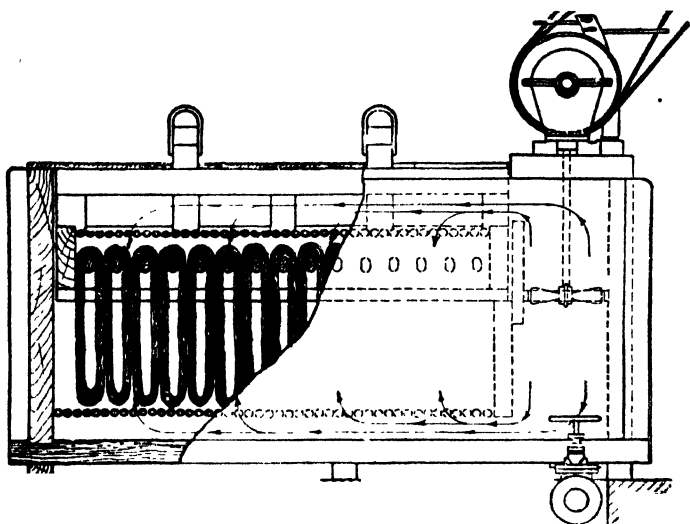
A.—Hank-dyeing machine (longitudinal section). (The Longclose Engineering Co., Ltd.)
